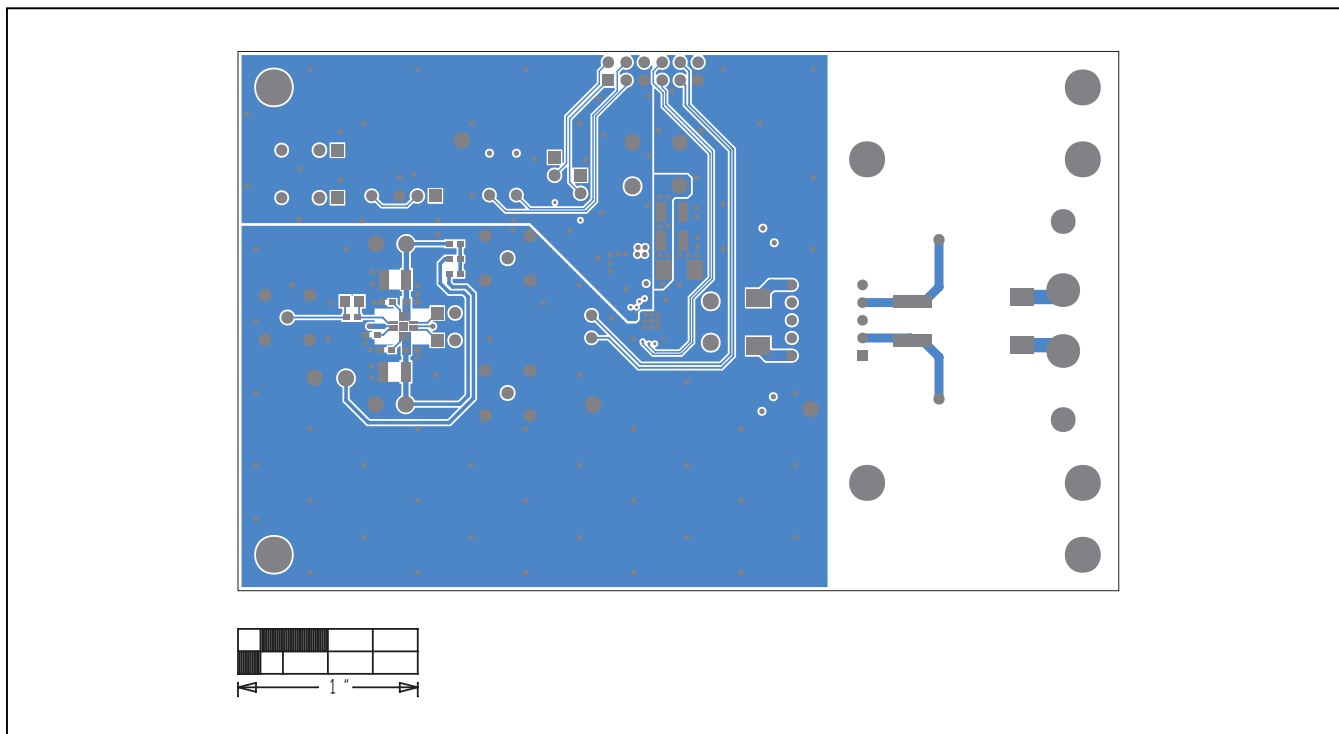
MAX44211 EV Kit PCB Layout—Solder Side
